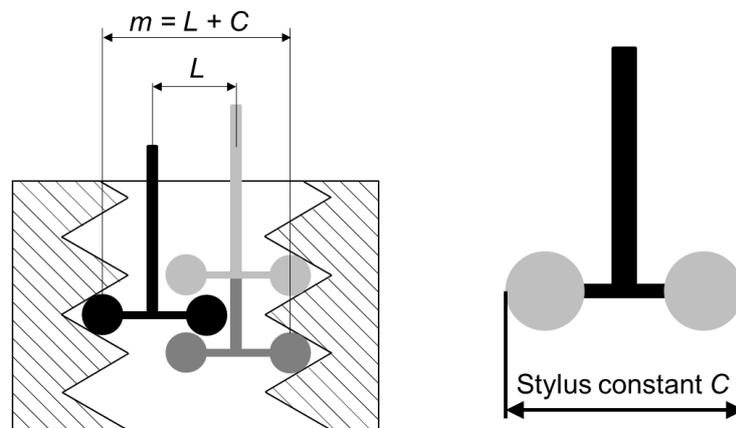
Measurement of the indicated value m on a single-start internal thread using the two-ball method
